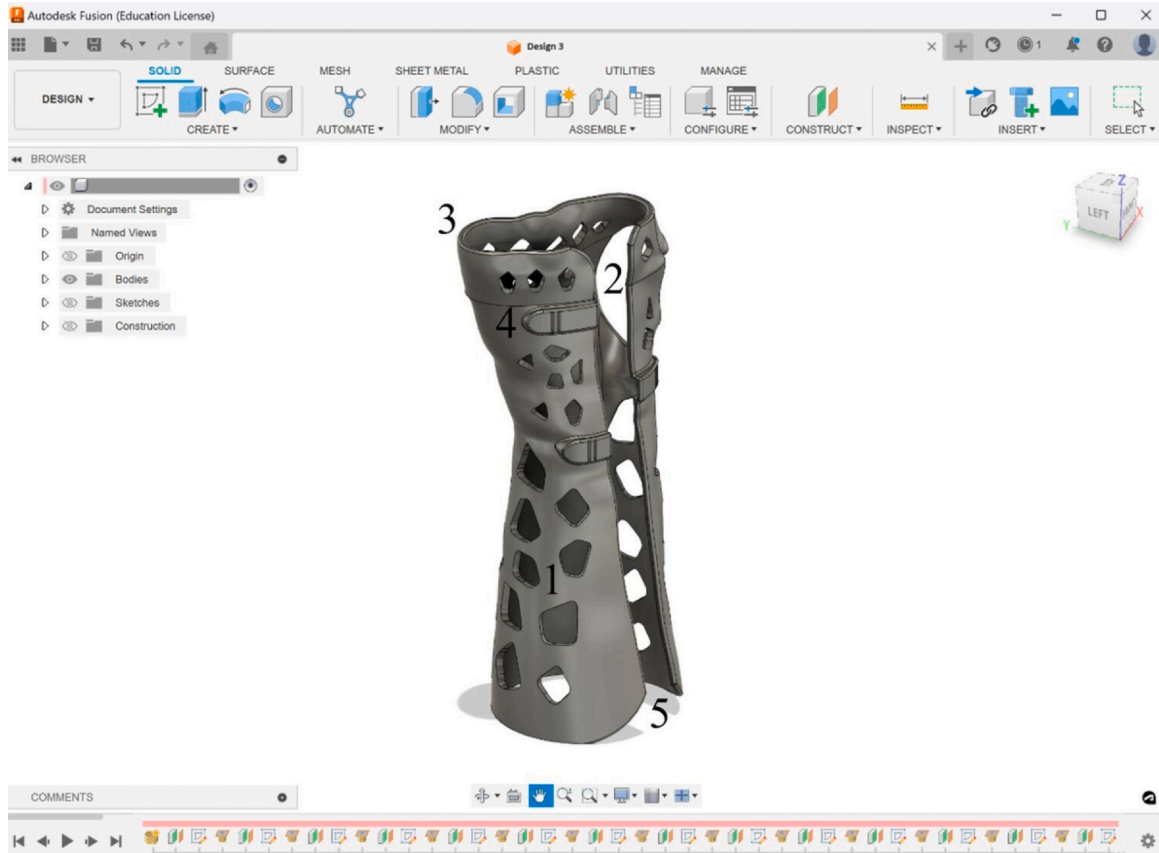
Final Design 1. 1 – Voronoi pattern; 2 – Thumb insertion; 3 – Soft edges; 4 – Sensor shape; 5 – Posterior opening.
